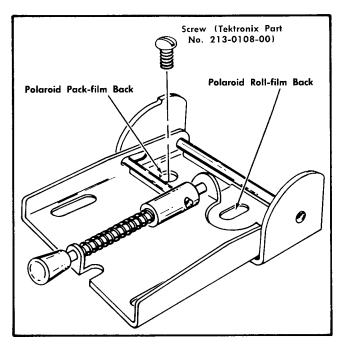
Selecting proper mounting hole in Power Supply Mounting Bracket (122-0713-00).
